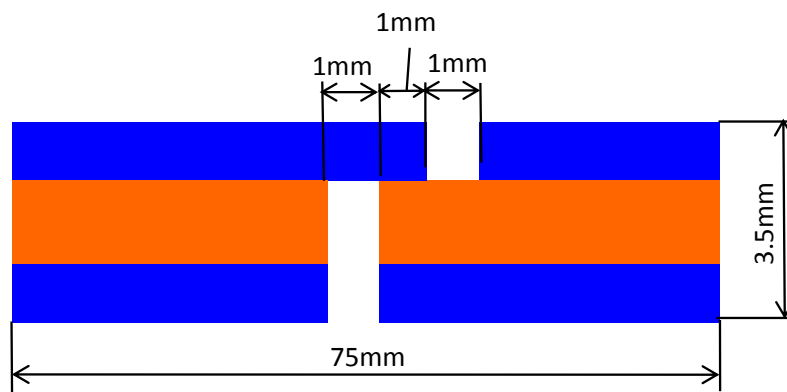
Tensile shear test specimen(Width:15mm).
